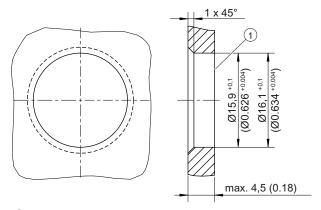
Mounting DRIVE-CLiQ cabinet bushings for cables with RJ45 connectors
